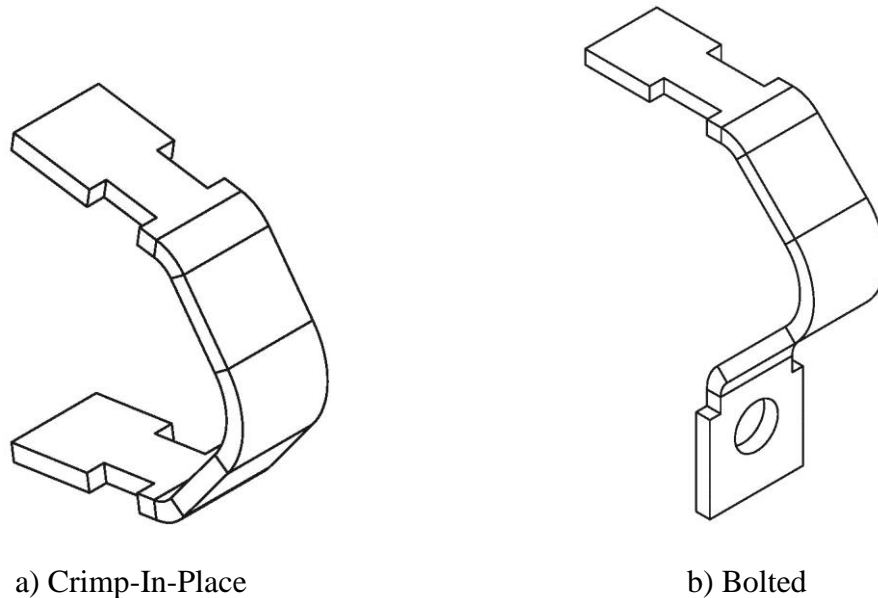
Tabbed Brackets—(a) Crimp-In-Place and (b) Bolted
